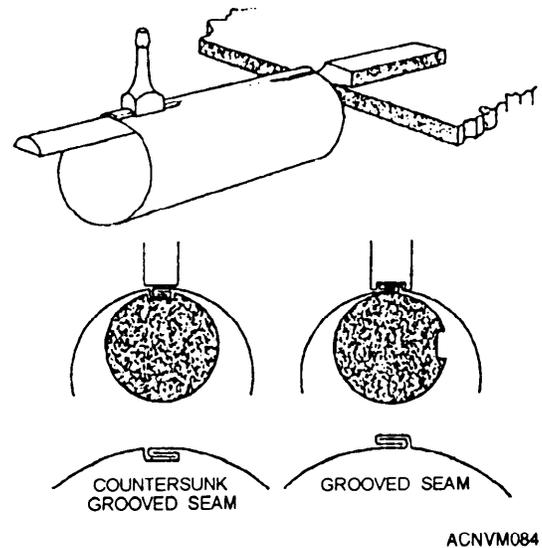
Completing the grooved seam with a hand mandrel.
